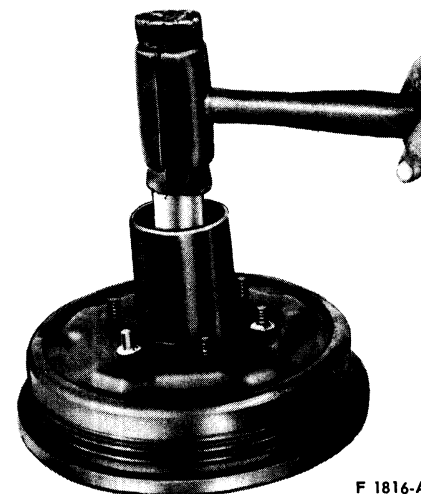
Lock Nut, Lock Ring and Adjusting Nut Removal
